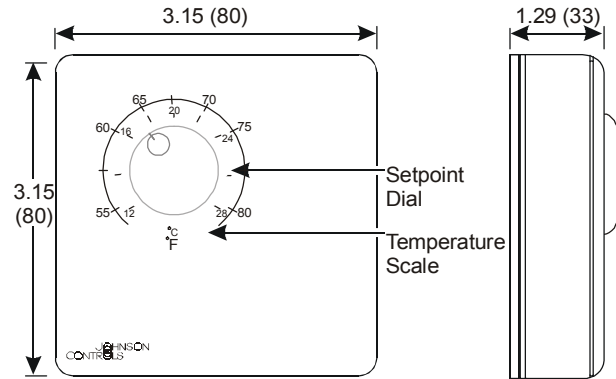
TCN-890x Cover Dimensions, in. (mm)
